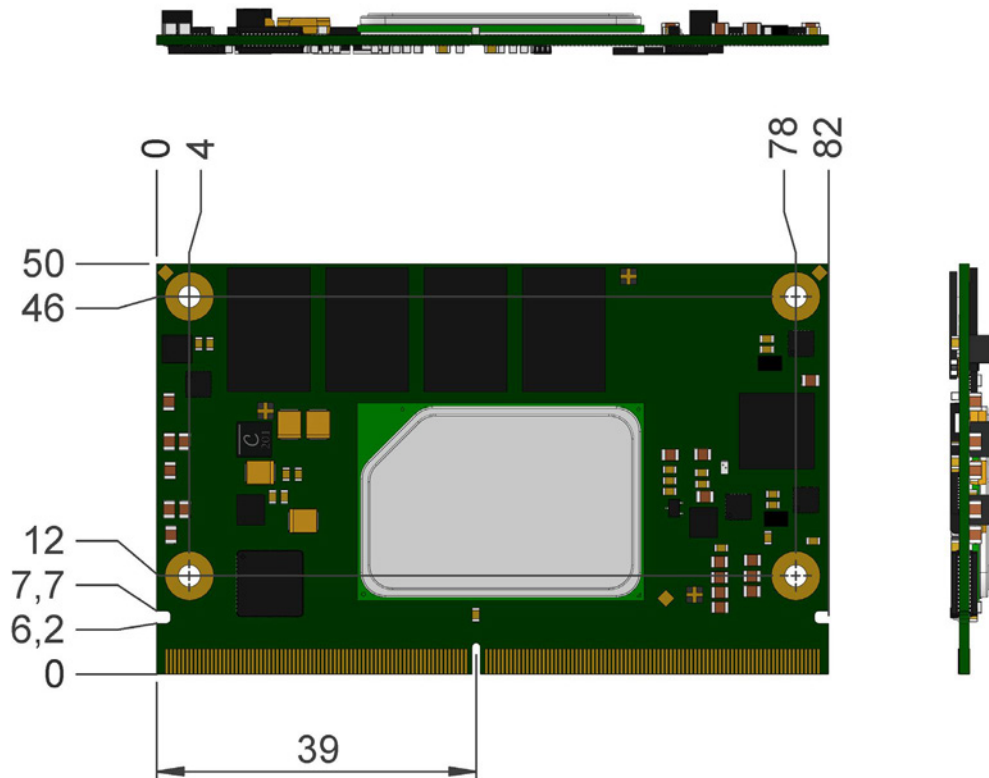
Three-sided drawing TQMxE40S (dimensions in mm)
